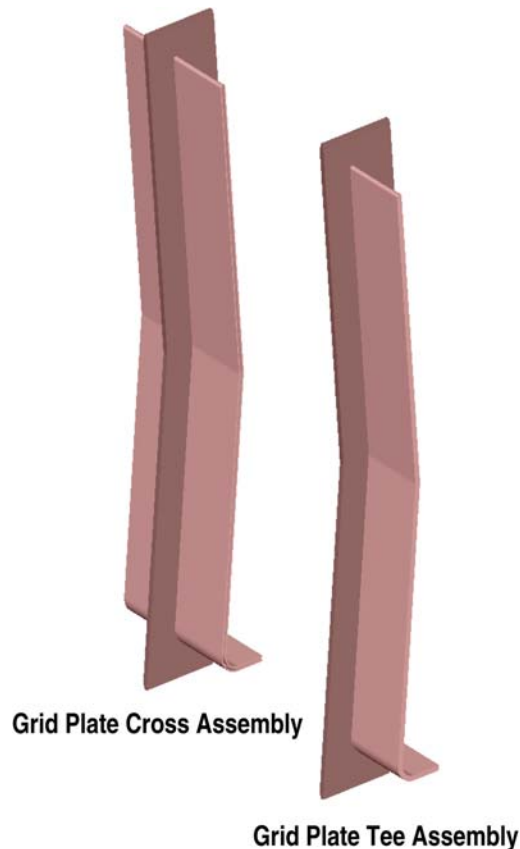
View showing the two sub-assemblies of the grid plate.
